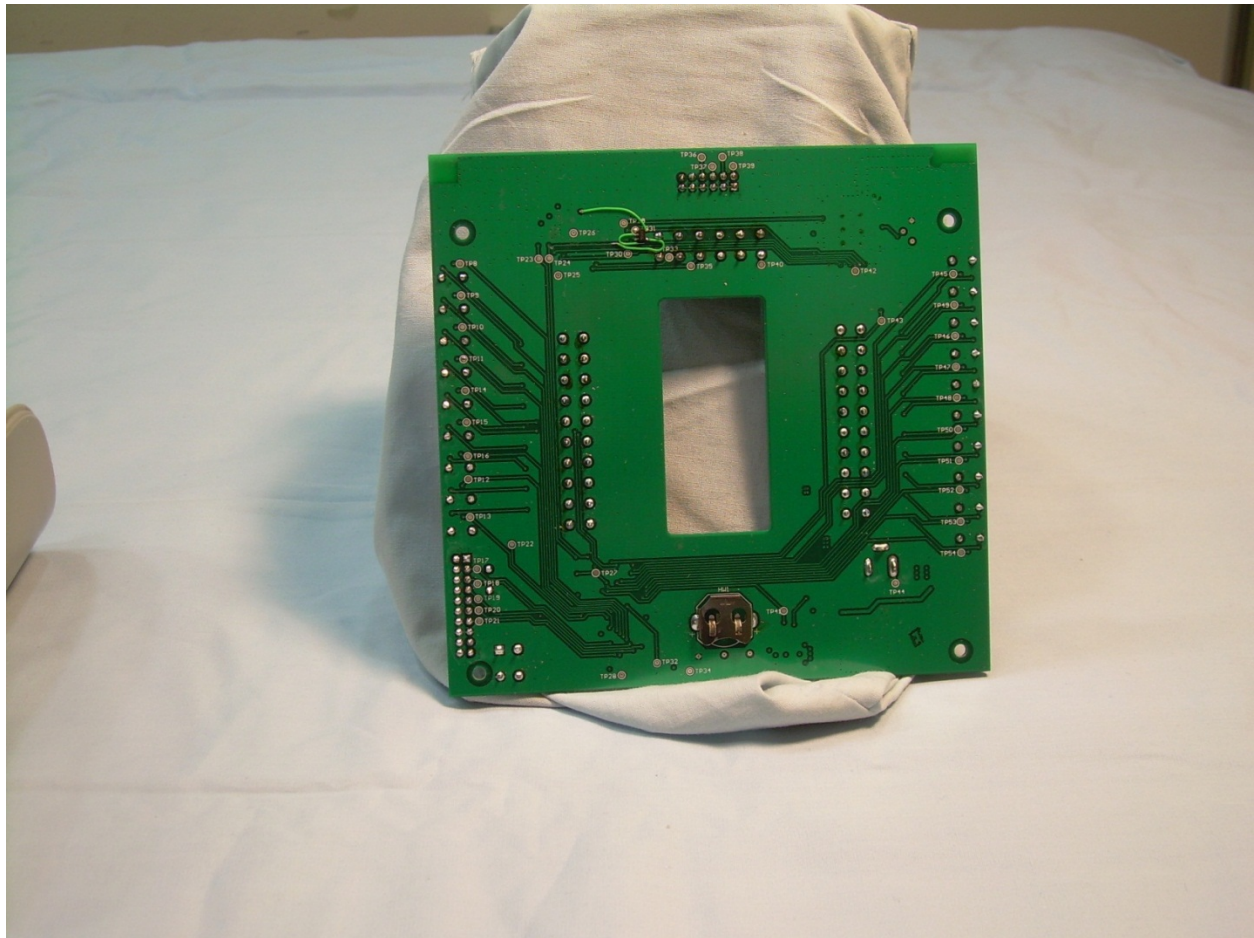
View of the Front PCB Housing Removed from the Mounting/System Interface Housing
